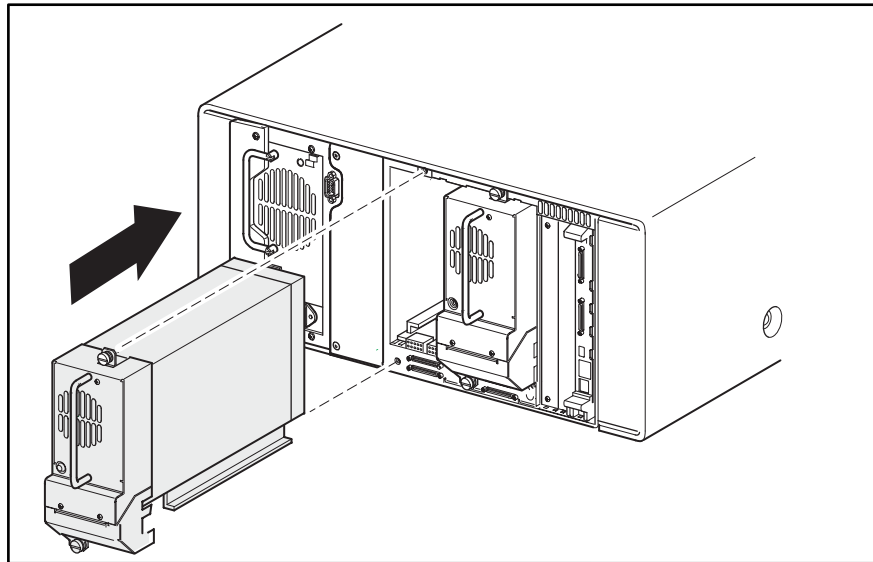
Removing a drive shoe assembly (with tape drive)
